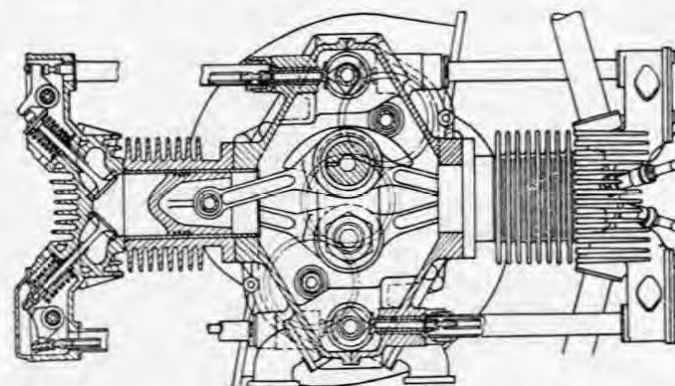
Transverse section of the four-cylinder A.B.C. engine.
